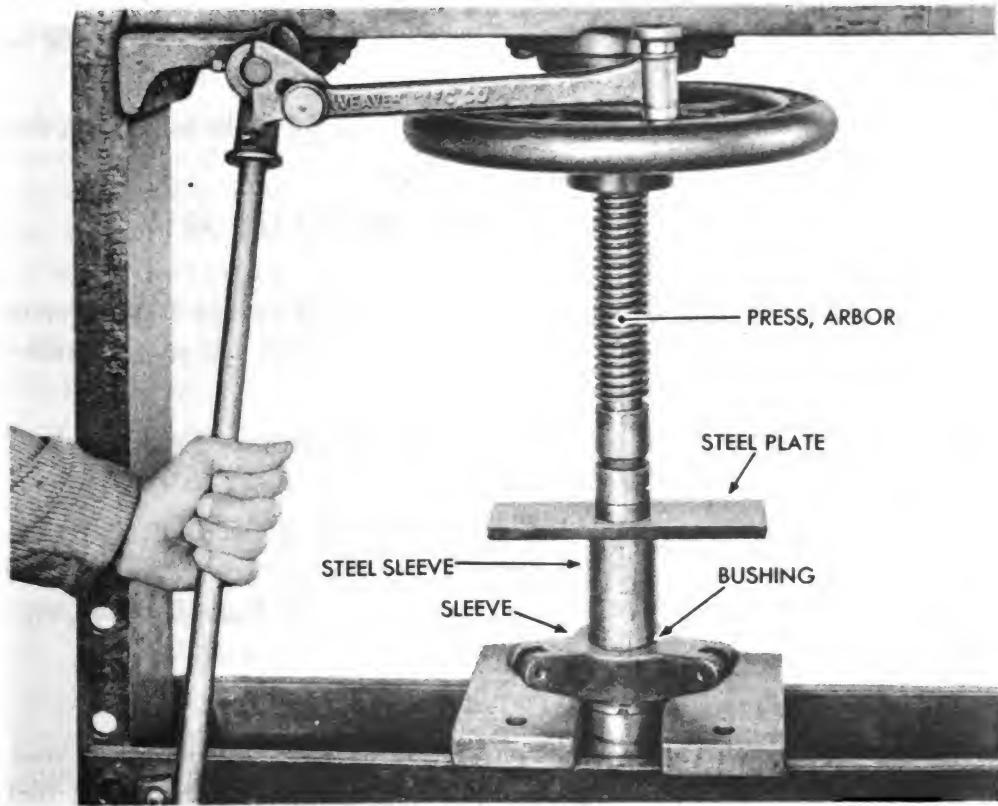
Installing Bushing in Engine Clutch Sleeve
